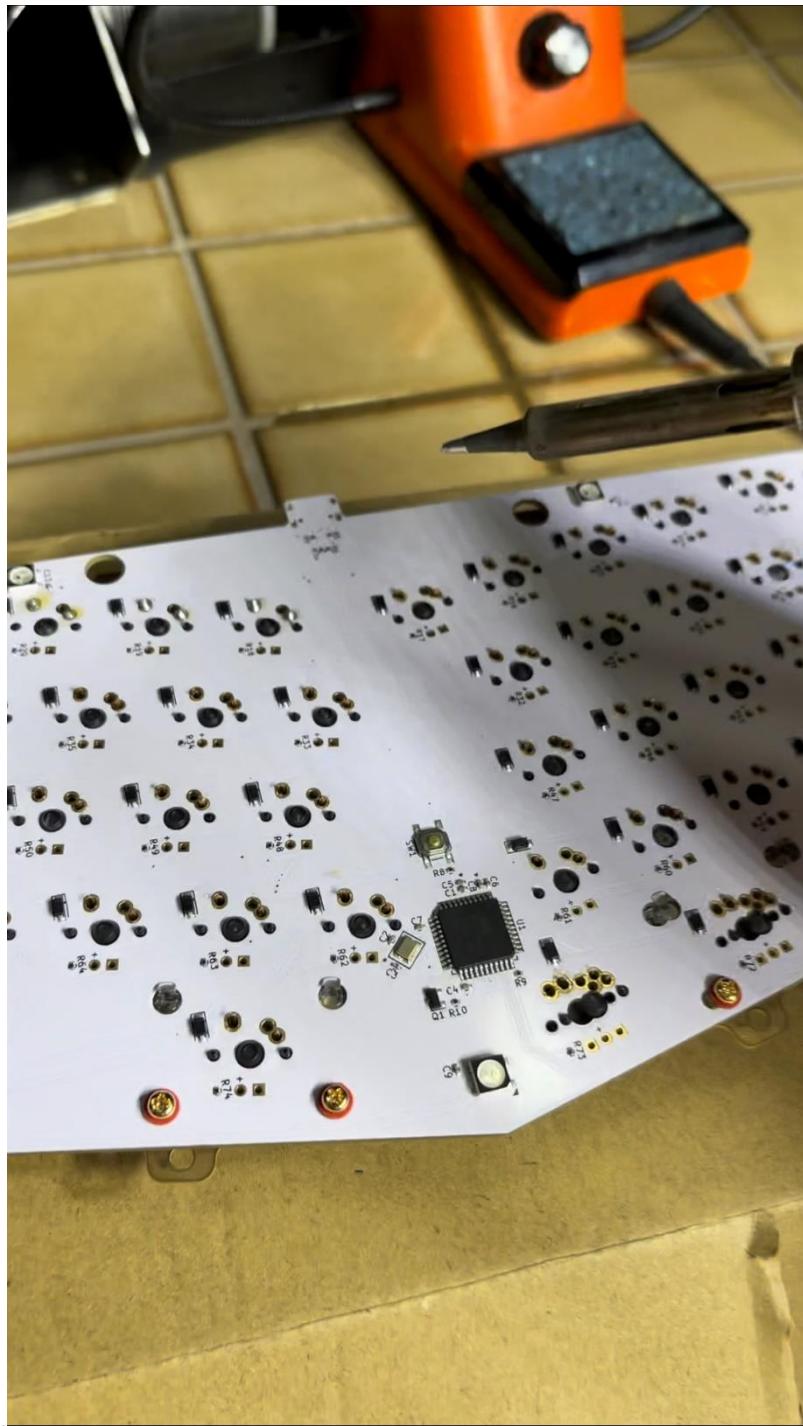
Soldering Gateron Black Ink V2 switches onto OSA Alice PCB.
